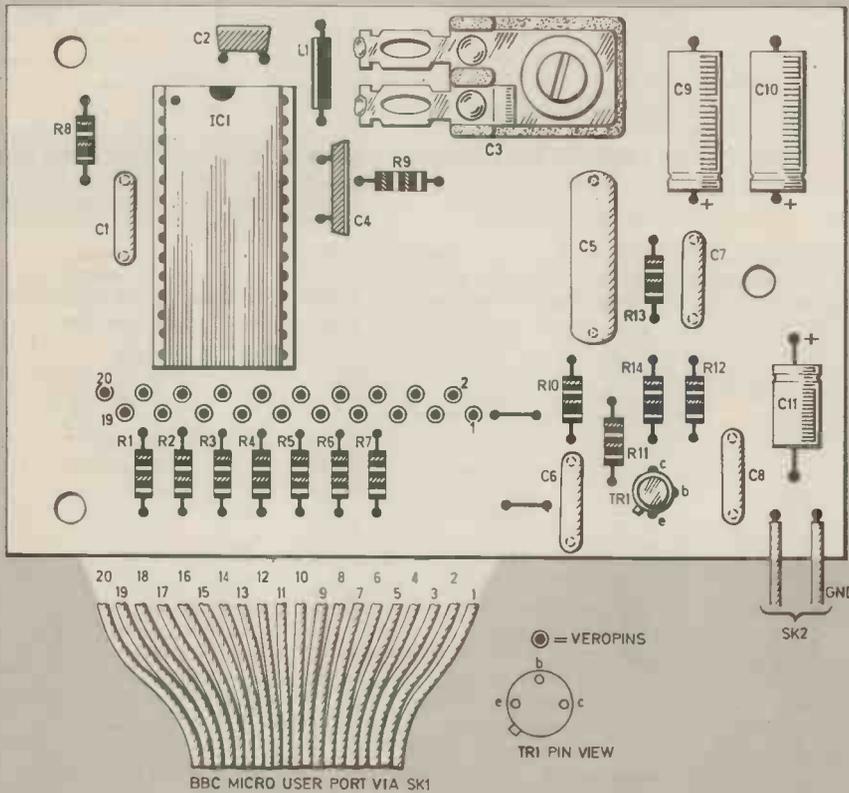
Layout of components on the topside of the p.c.b. with wiring to BBC User Port.
